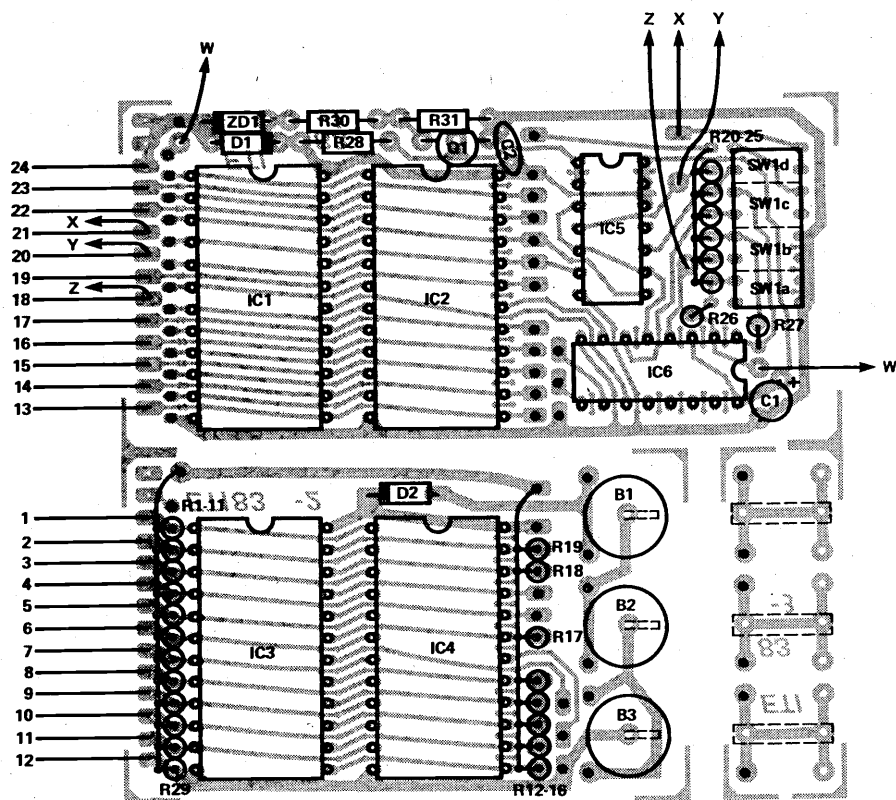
Component overlay for the PseudoROM. Remember to separate the three boards before soldering!
